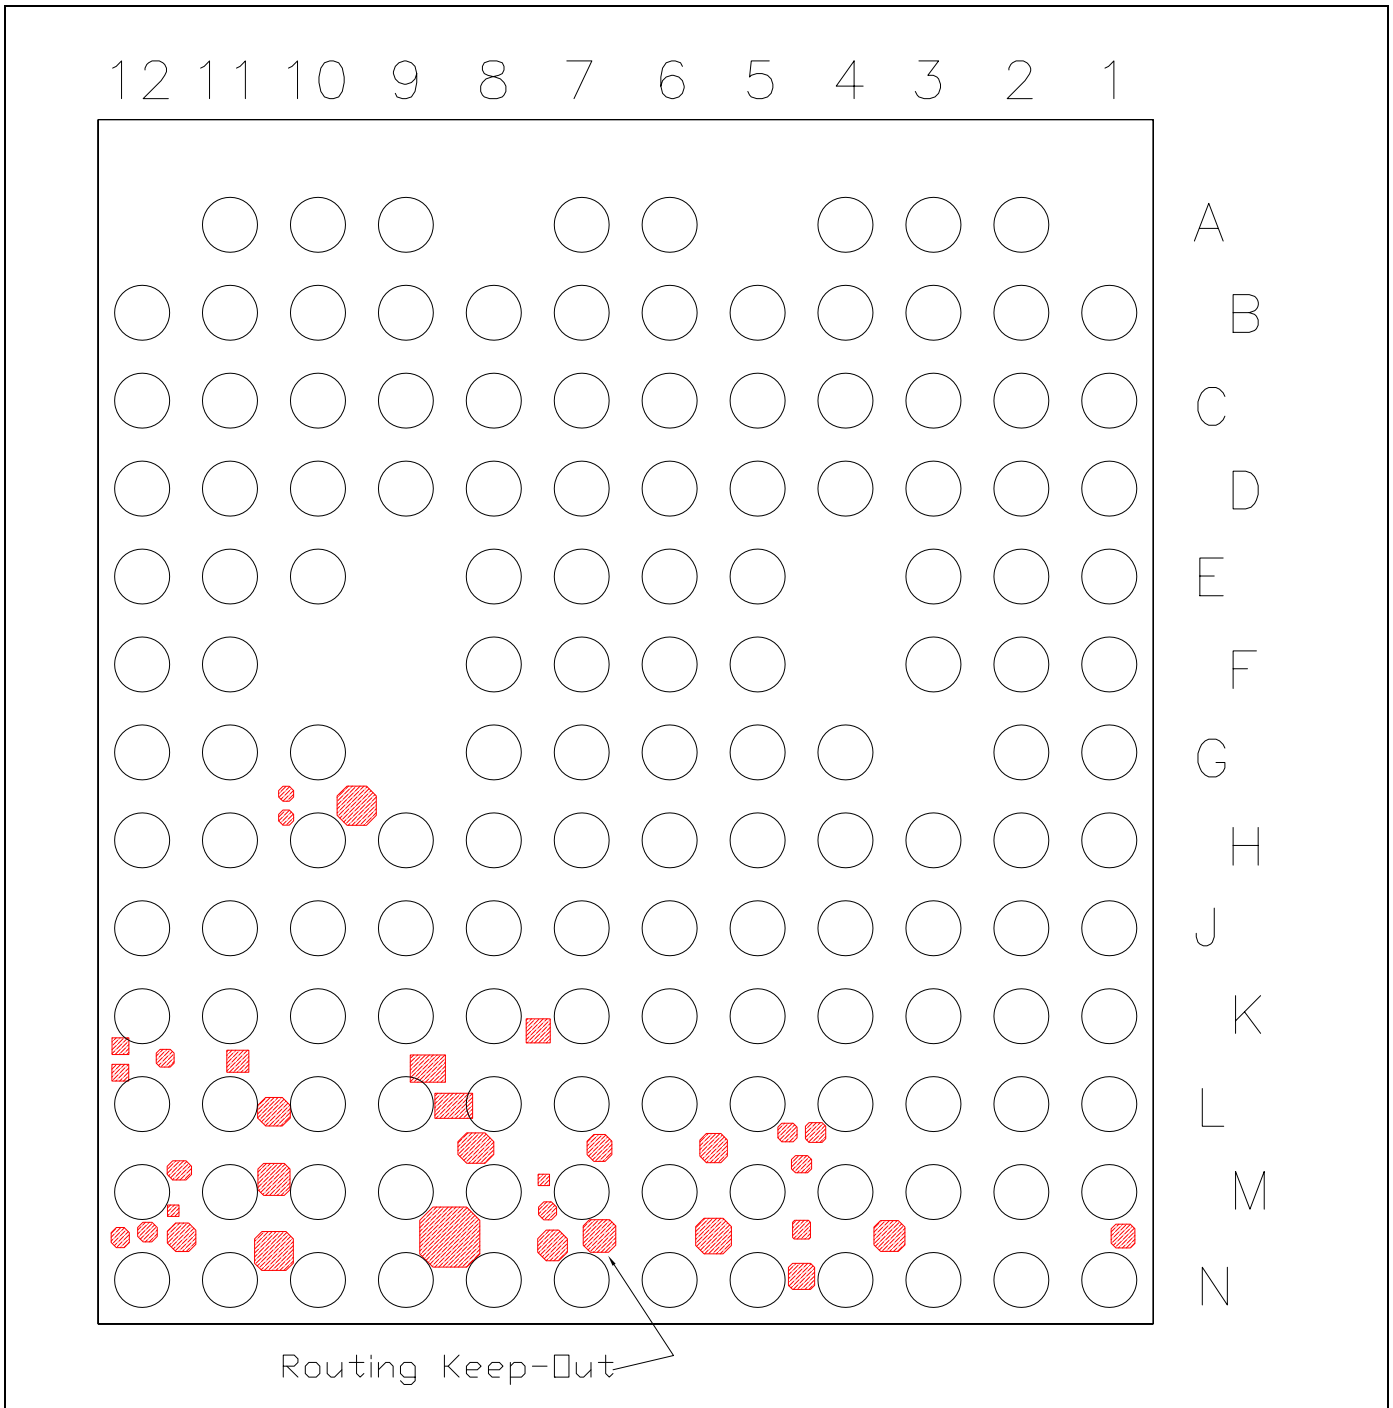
WLBGA Keep-out Areas for PCB Layout—Bottom View with Balls Facing Up
